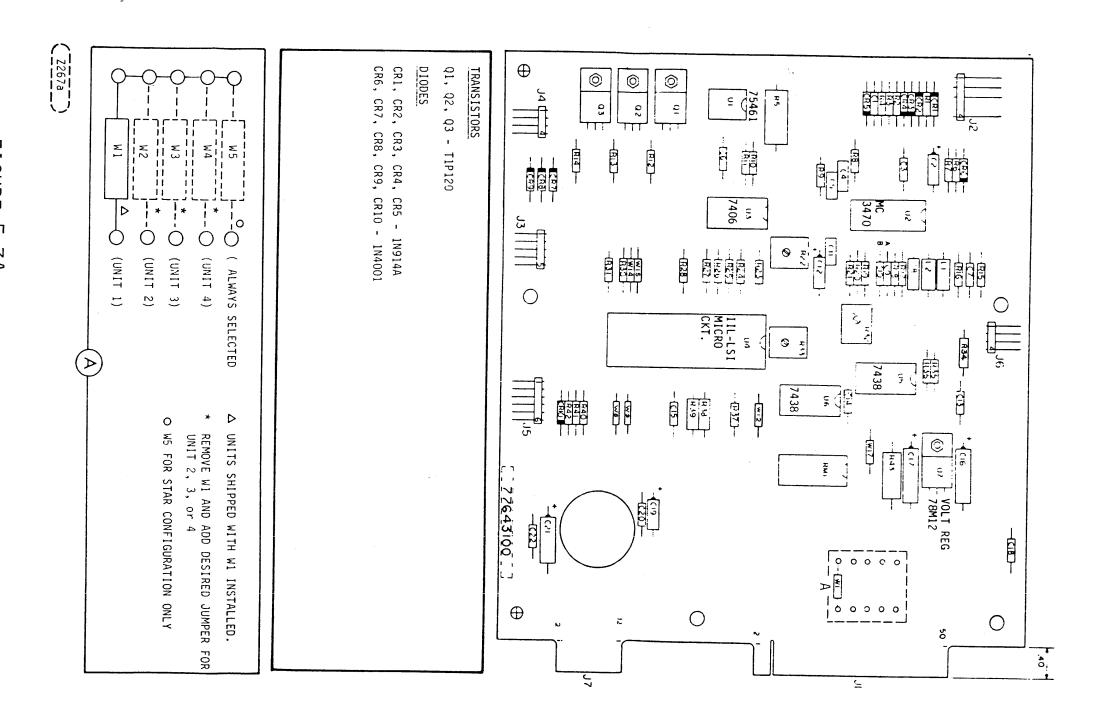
A. ASSEMBLY AND PARTS LIST (PWA 77643100)
